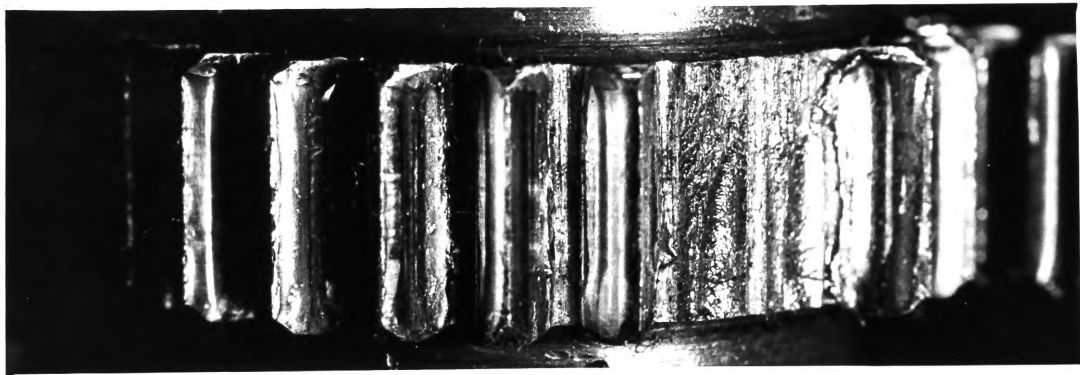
TEETH OF GEAR SET 4 PINION - 2521 HOURS
